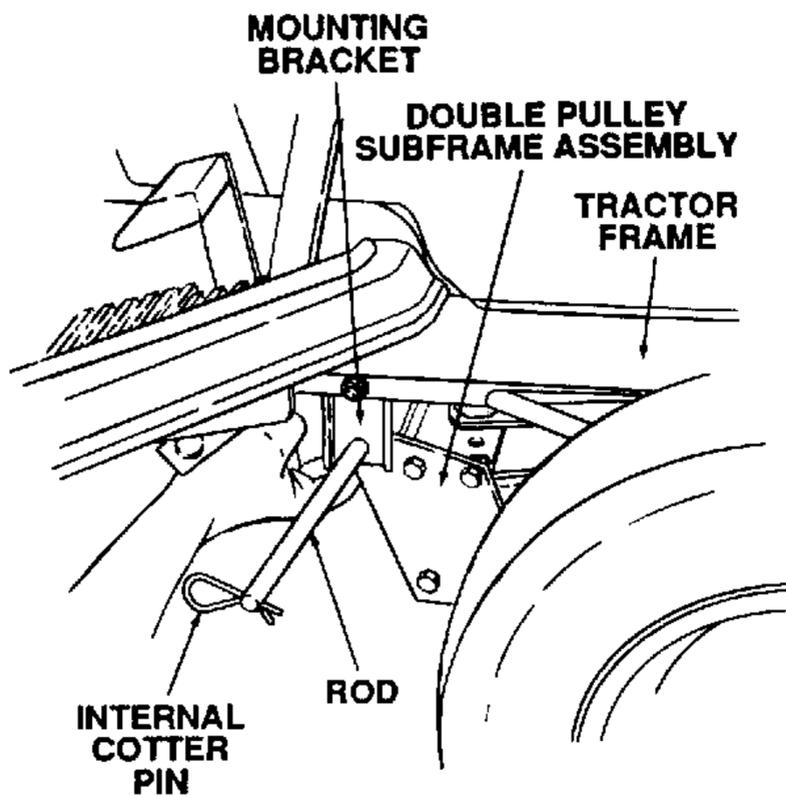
Attaching Double Pulley Subframe Assembly.
